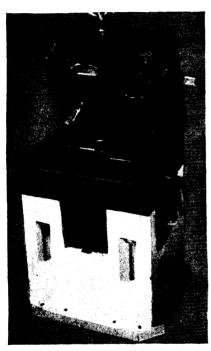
Simple combination die having two dissimilar impressions for casting small aluminum parts. Dies such as these are used quite frequently when production requirements of the two parts are similar.
